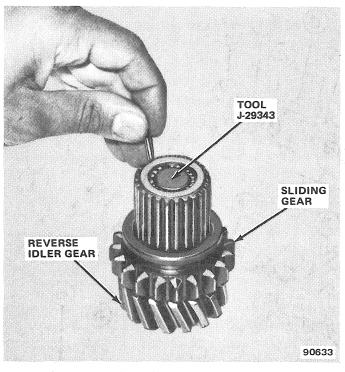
B-34 Reverse Idler Gear Needle Bearing Installation
